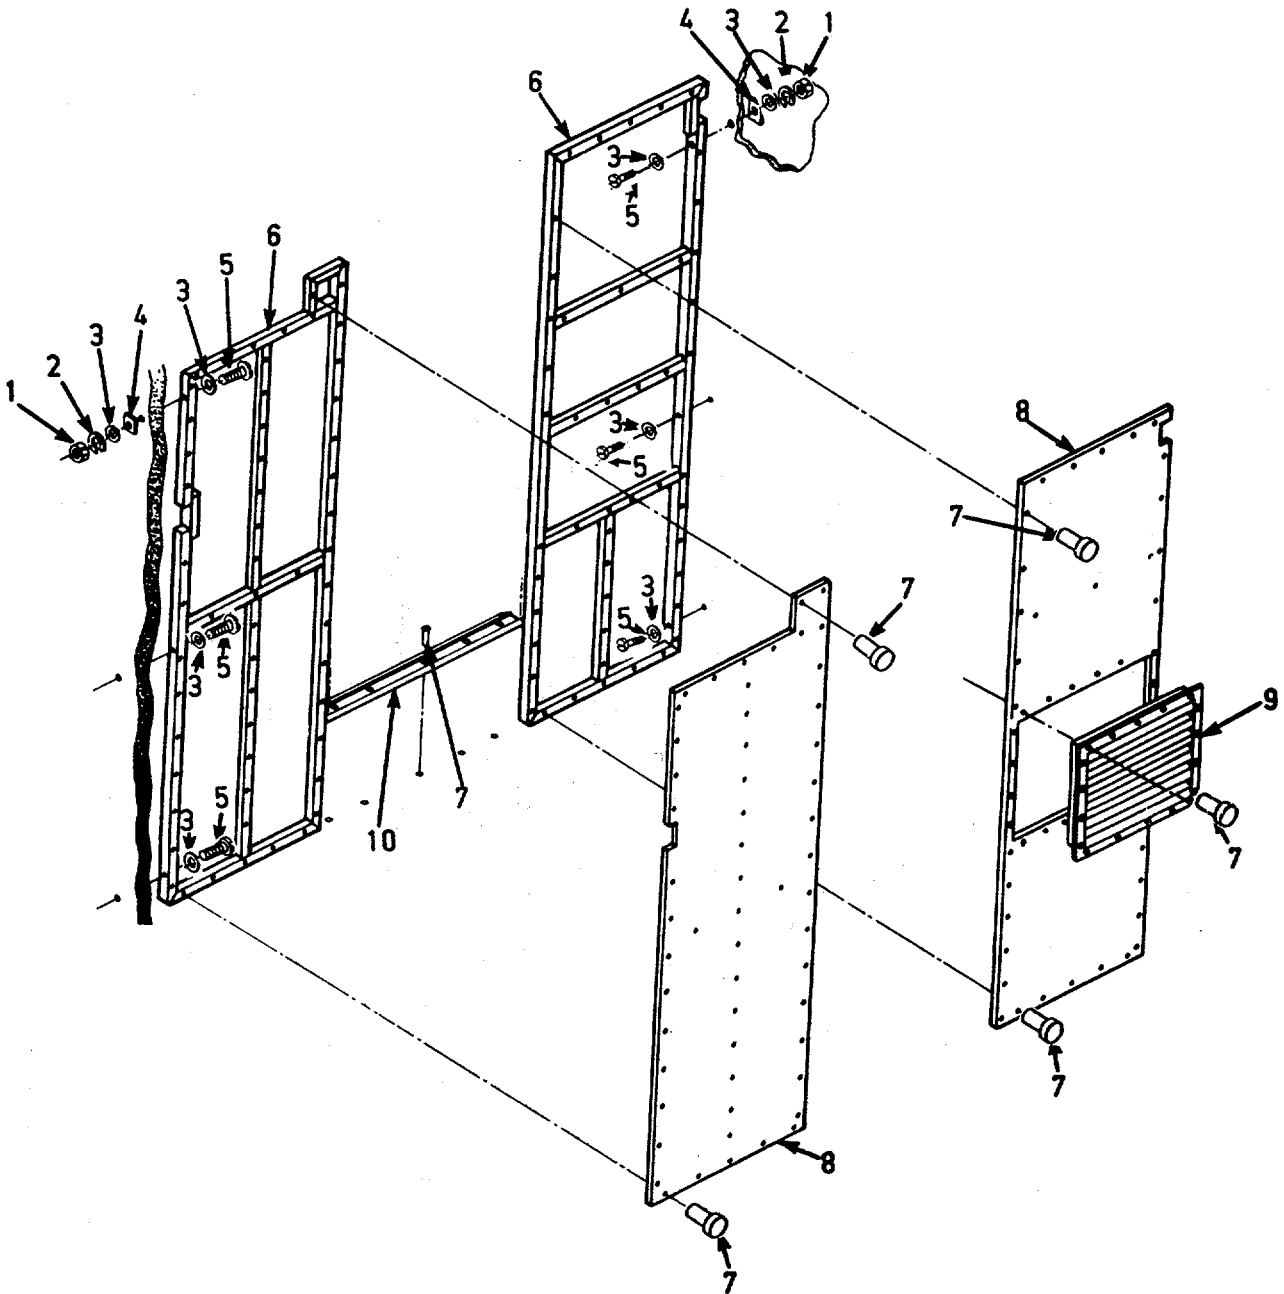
Wall Partition Assembly (Sheet 2 of 2)
